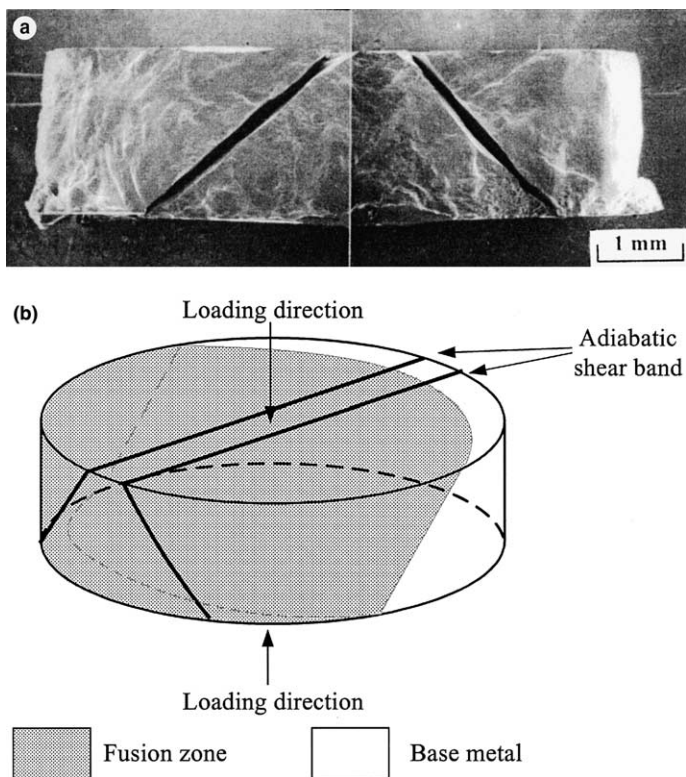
(a) Fractograph of tested weldment after fracture at strain rate of $4.5 \times 10^3 \text{ s}^{-1}$; (b) schematic representation of fracture features and orientation of adiabatic shear band.
